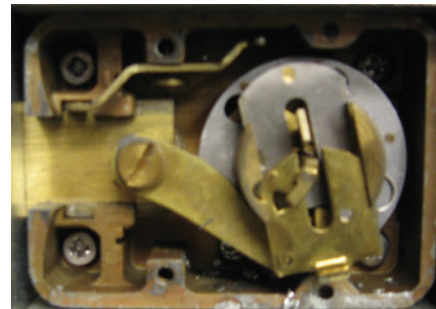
The lever was forced into the wheelpack with a probe and then over to the left to retract the bolt.
